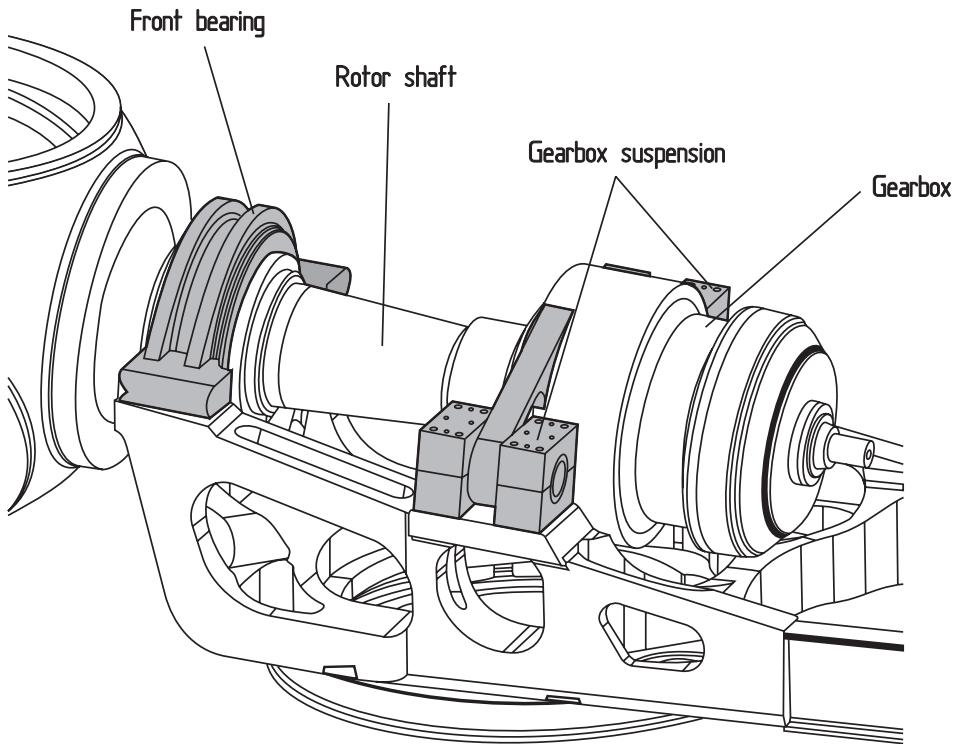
Three point suspension of the rotor shaft/gearbox assembly of the NORDEN N 80
